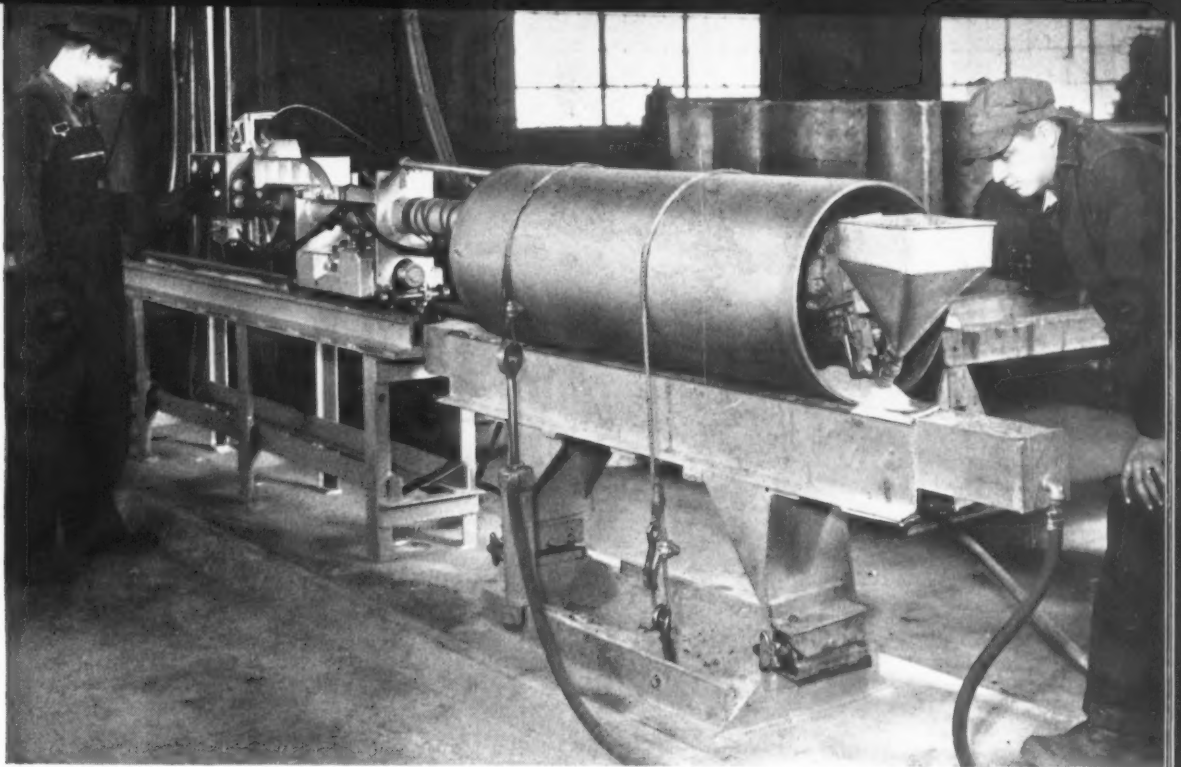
Fixture with Four Air Cylinders for Holding the Edges of the Rolled Cylinder Tightly together during Tack-welding
